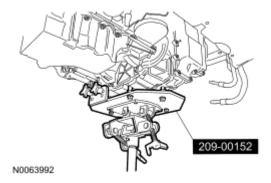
Supporting Transaxle Using Special Tool (209-00152) & A Suitable Transmission Jack Courtesy of FORD MOTOR CO.
